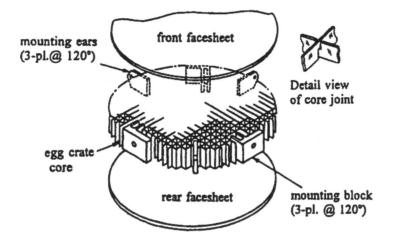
Construction details of a 32-in. (81-cm) diameter egg crate mirror prior to assembly. (Courtesy of Goodrich Corporation, Danbury, CT.)
